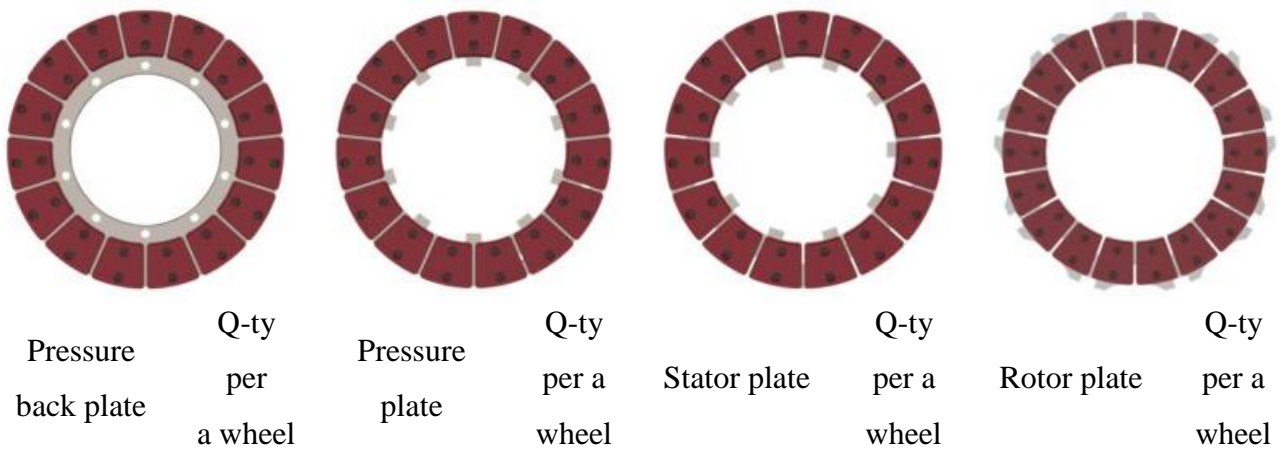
Structure and Design of Wheel Brake Discs for Brake Wheels of the An-32, An-72 and An-74 Aircraft Landing Gear
